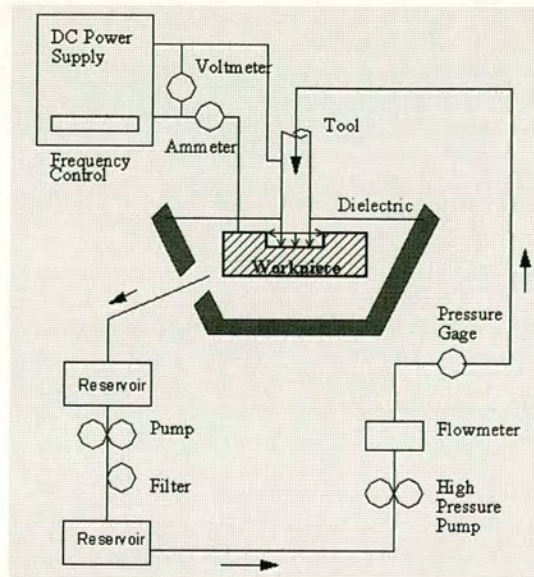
Schematic showing all the components necessary for an EDM machine.
